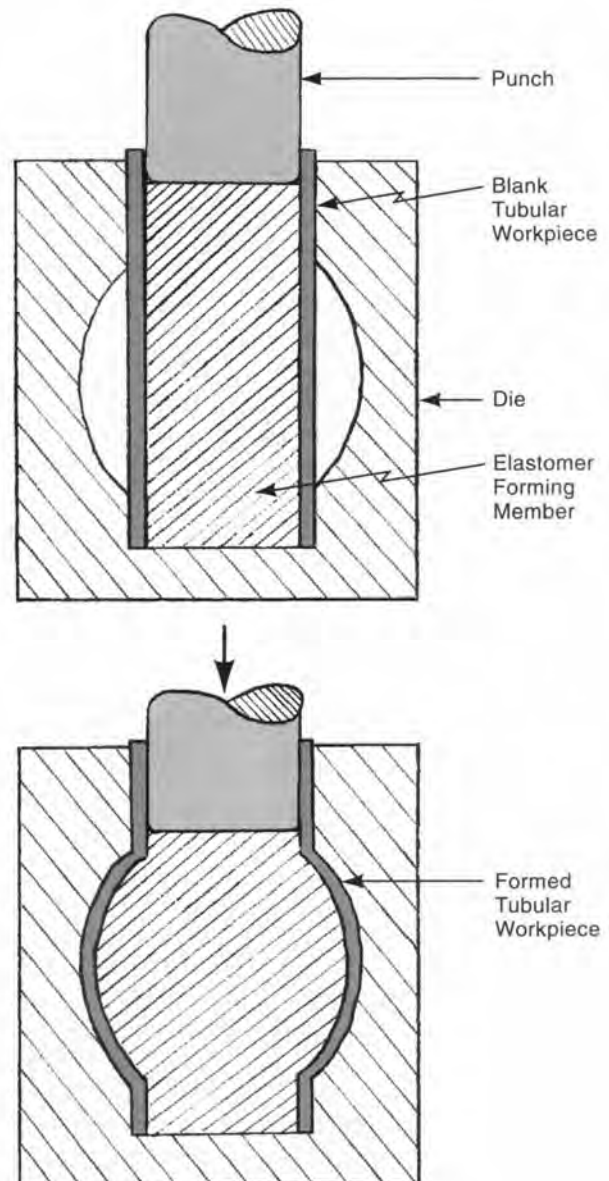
H2i Hydraulic bulging of tubing with an elastomer. The elastomer is deformed by the descending punch and forces the tubular workpiece outward into the die.
